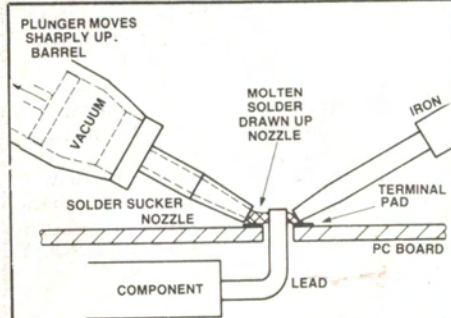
Using a solder sucker. First heat the joint until the solder melts. Then apply the solder sucker nozzle and release the plunger to suck up the molten solder. It is sometimes best to remove the iron before releasing the plunger. The solder sucker's nozzle and barrel has to be cleared of the solid solder 'dags' periodically.
